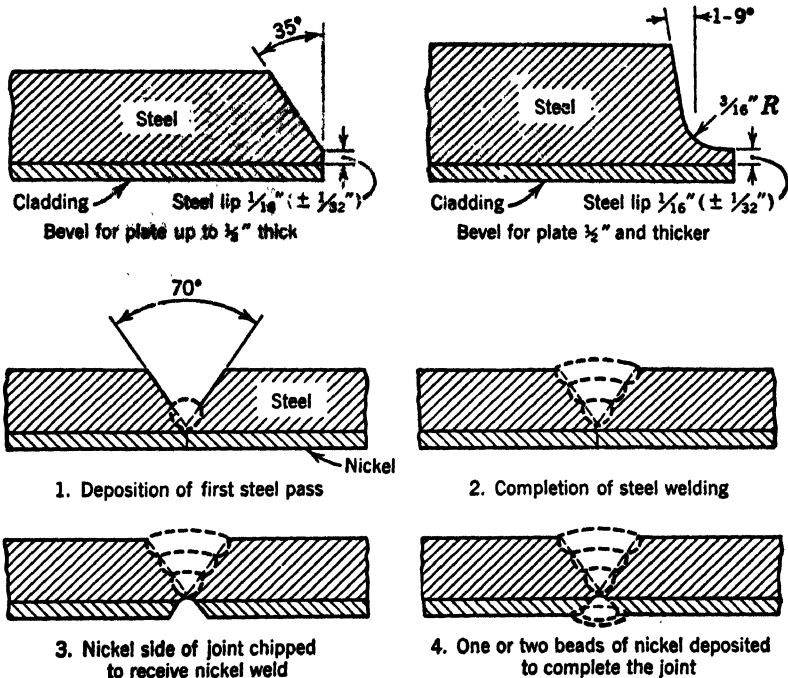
Welding Sequence for Nickel-Clad Steel. The same sequence is followed for welding Monel-clad and Inconel-clad steel plate but Monel and Inconel electrodes, respectively, are used for welding the clad side.
